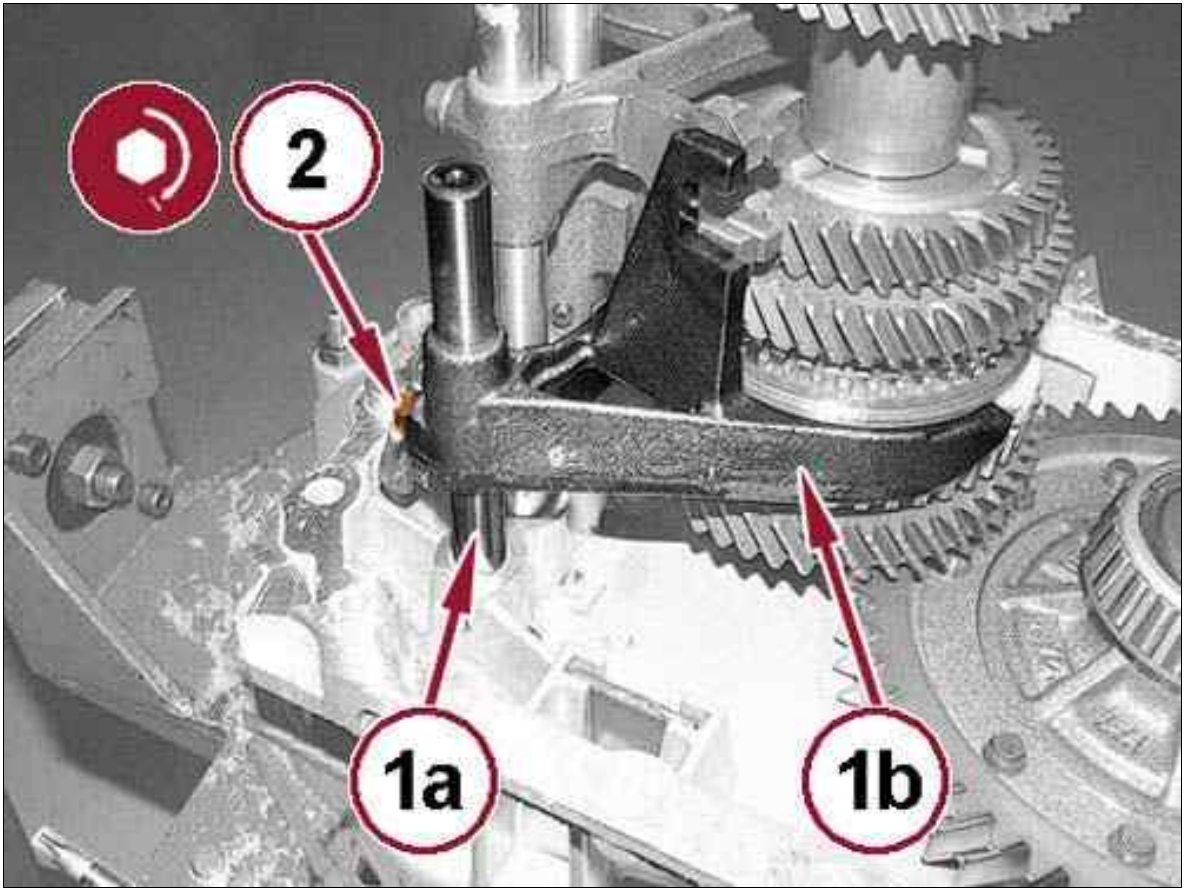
5th And Reverse Gear Shift Rail, 3rd And 4th Gear Shift Rail & Shift Fork
